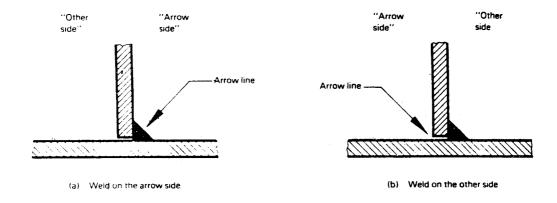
T-JOINT WITH ONE FILLET WELD
